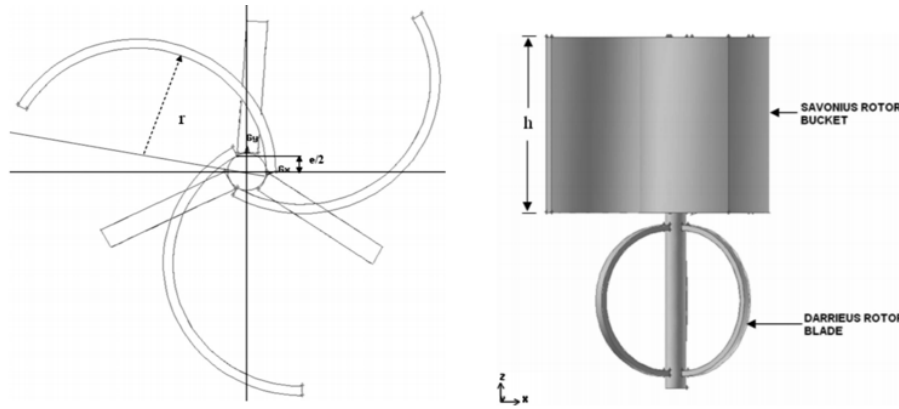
Top view and front view of physical model of combined type wind turbine [21].
